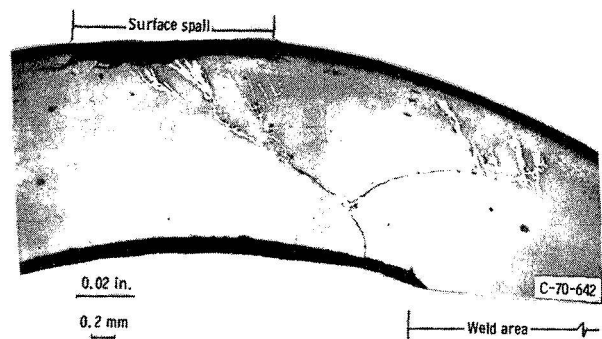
Typical section through junction of weld and running track, showing crack connecting inside of wall with spall on outer surface. AISI M-50 steel, 11/16-inch (17.5 mm) diameter hollow ball; upper test ball in five-ball fatigue tester, 700 000 psi maximum Hertz stress. (Picral-HCL etch)
